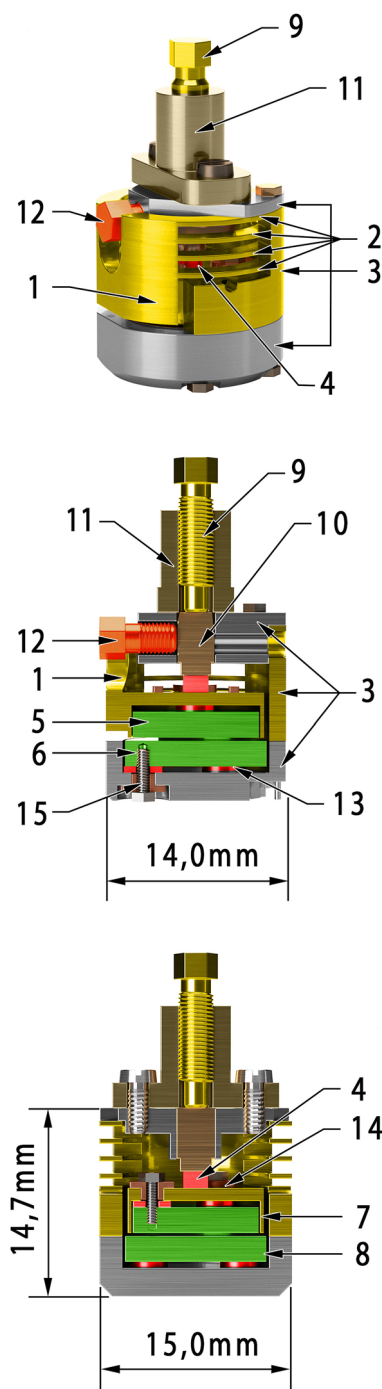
Schematic drawing of our new mini-stress dilatometer. The top picture shows a 3D view, the middle picture shows a side cut-away view, and the one at the bottom shows a front cut-away view of the dilatometer. (1) Moving part, (2) four Be–Cu flat leaf springs, (3) external frame, (4) sample, (5) upper capacitor plate, (6) lower capacitor plate, (7) and (8) guard rings, (9) adjusting screw, (10) cubic piston, (11) removable sample-adjusting tool, (12) locking screw, (13) sapphire washer, (14) insulating piece of vespel, and (15) electrical connection soldered on the screw.
